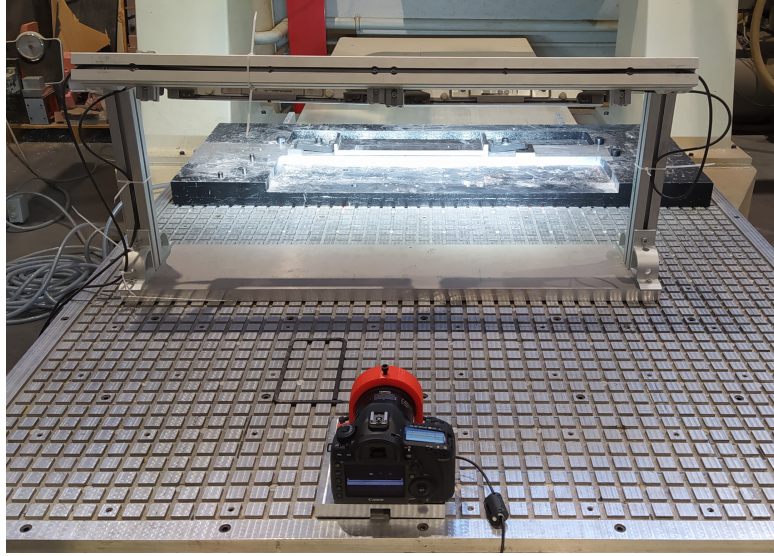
Experimental setup with the machine tool, the camera and the lighting system mounted on the machine-table, and the machined workpiece. The picture was taken at the end of the machining procedure.
